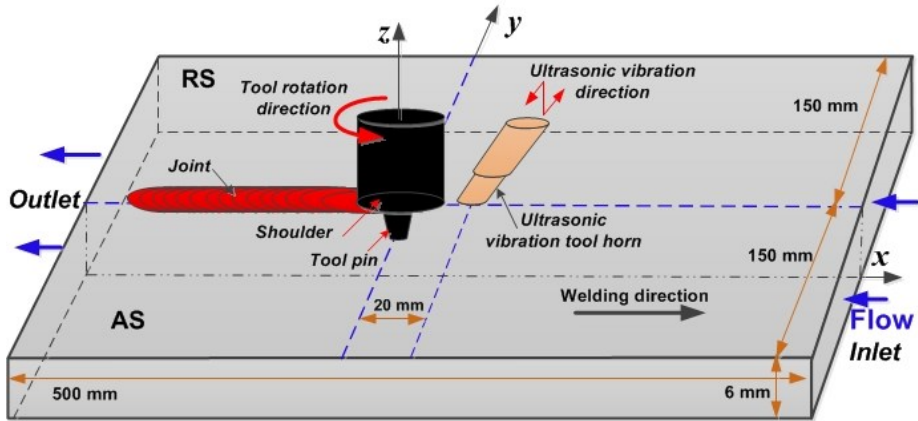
Geometrical model of ultrasonic vibration enhanced friction stir welding (UVEFSW).
